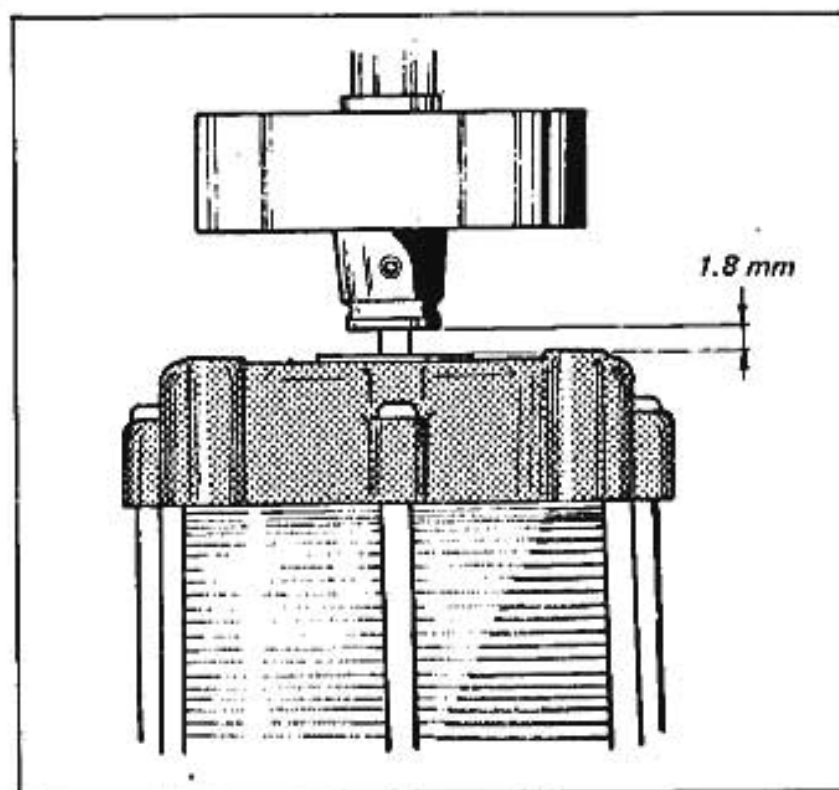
Proper clearance between the reel motor and the brake drum
